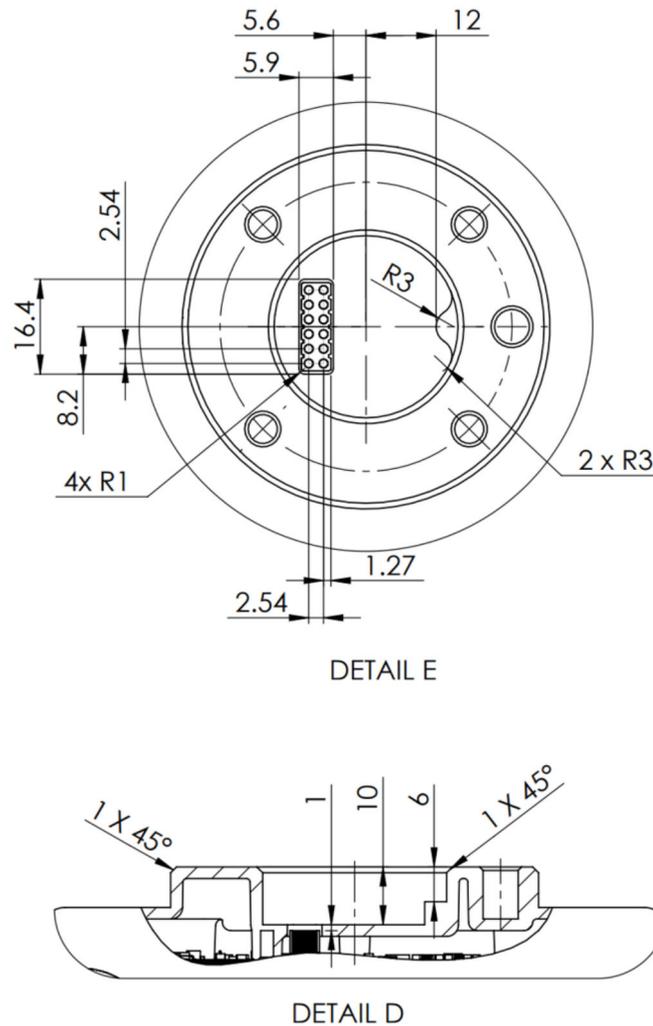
Dimensions of mechanical interface on the media flange, view 2 (dimensions in mm)
